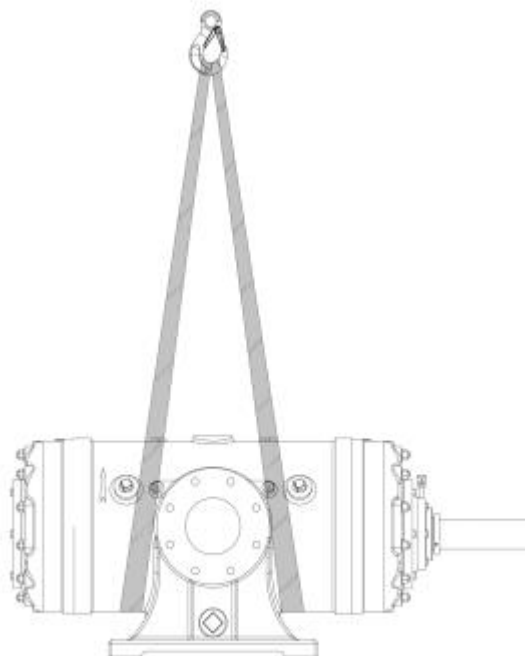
Compressor lifting with a sling. NEVER lift the compressor by the threaded holes in the cylinder head. The threaded holes are for lifting of the cylinder head only during maintenance and assembly.
